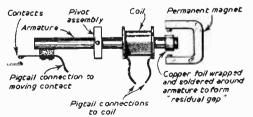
A suggested design for a relay which con be easily constructed in the amateur workshop. The possible contact assemblies are not, of course, limited to the simple arrangement shown here.
